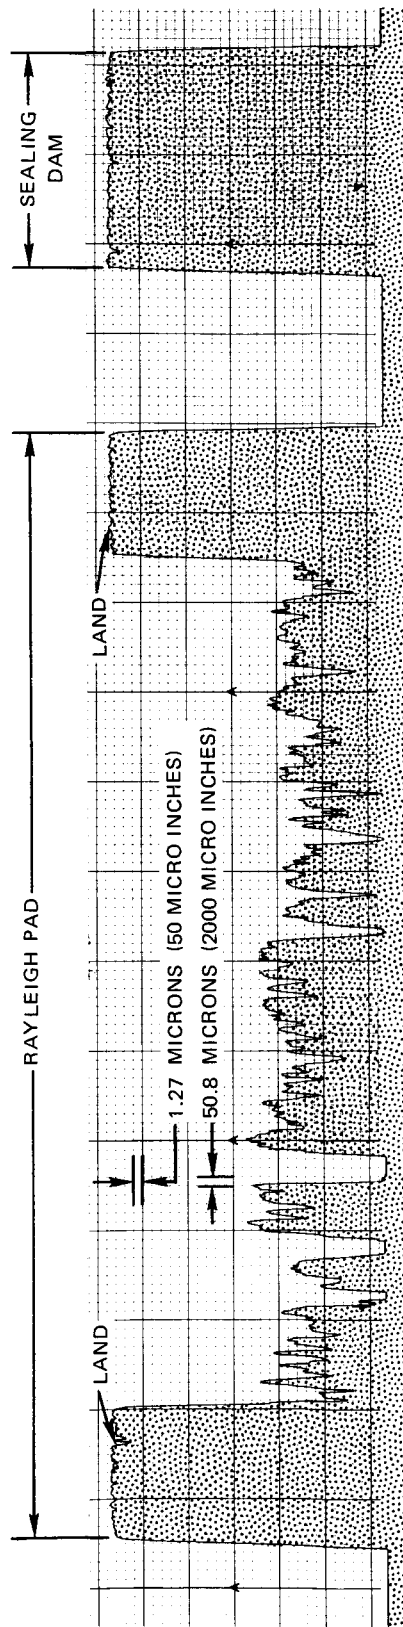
Representative Profile Trace Taken Radially Across the Face of the Carbon Nose-piece in New Condition Before Axial Seal Seat Runout Testing
